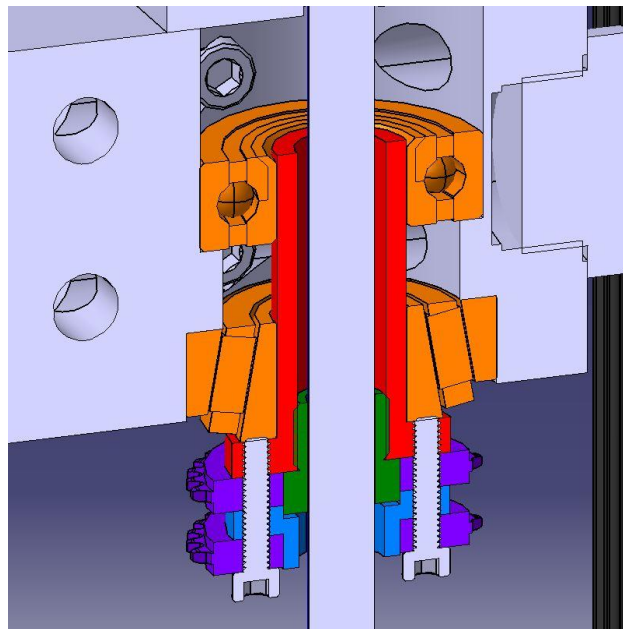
Z Table bearing block showing spindle (red), bearings (orange), Acme nut (green), WM Berg sprockets (purple), and bearing block (gray).
